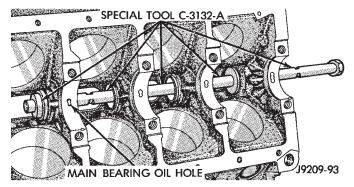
Camshaft Bearings Removal/Installation with Tool C-3132-A
